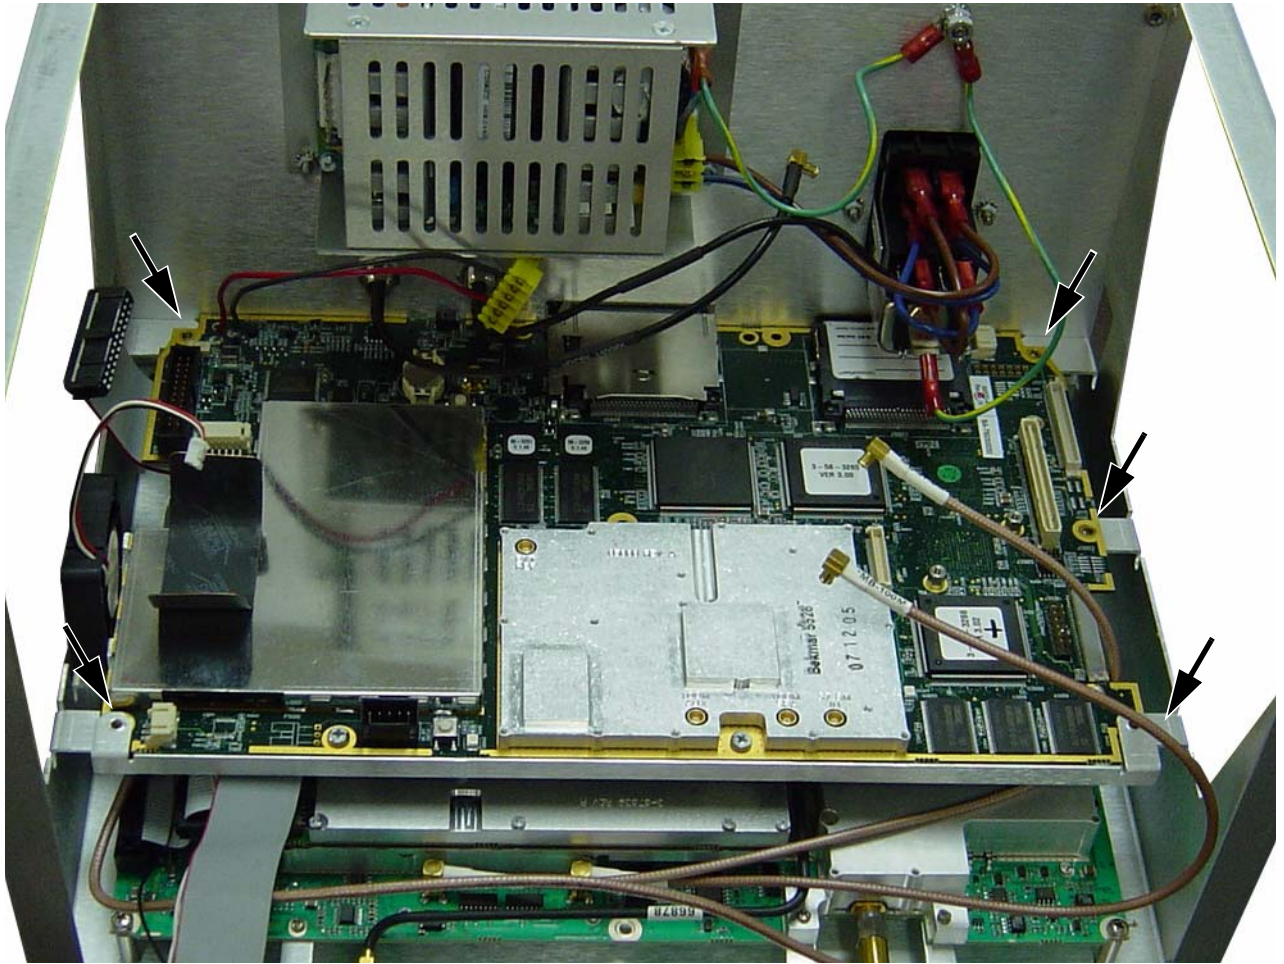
Main PCB Mounting Screws – Left and Right Edges
